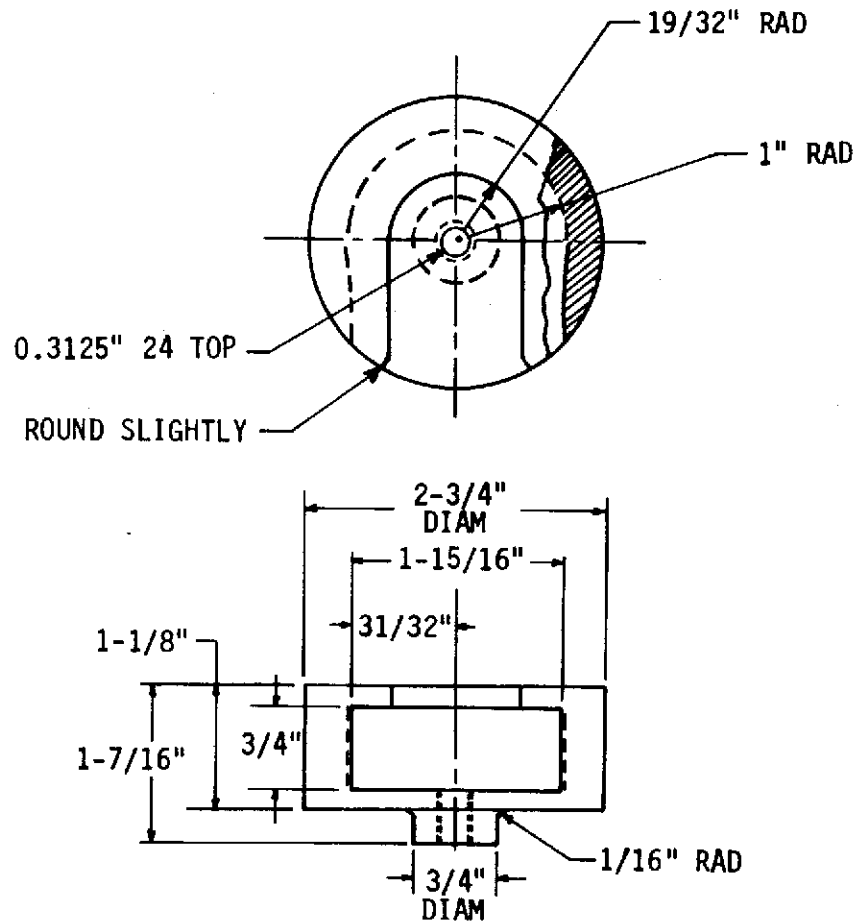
Corrosion Preventive Finish Test Grips (Cold-Rolled Steel)
